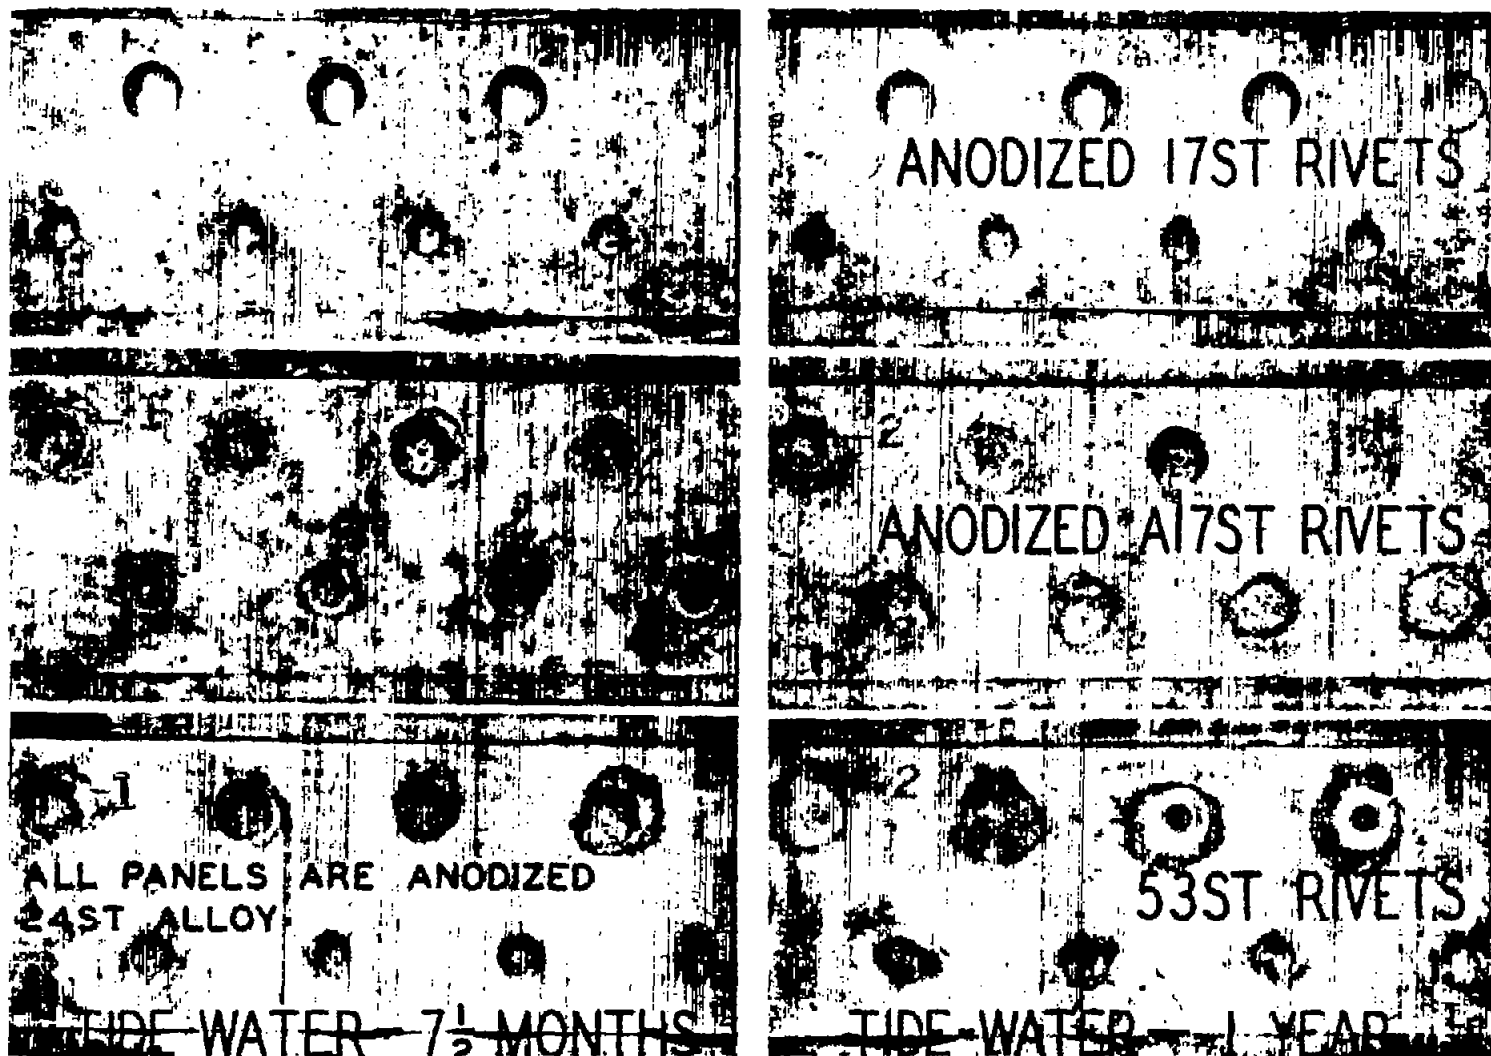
Rivets used on anodized 24ST alloy panels exposed to seawater. Note the severe corrosion on anodized A17ST and 53ST rivets, and the relatively slight attack on anodized 17ST rivets. In this, and all of photographs which follow, the large letters at the right apply to the entire horizontal rows, while those at the tops or bottoms apply to the entire vertical rows. $\times 1$
